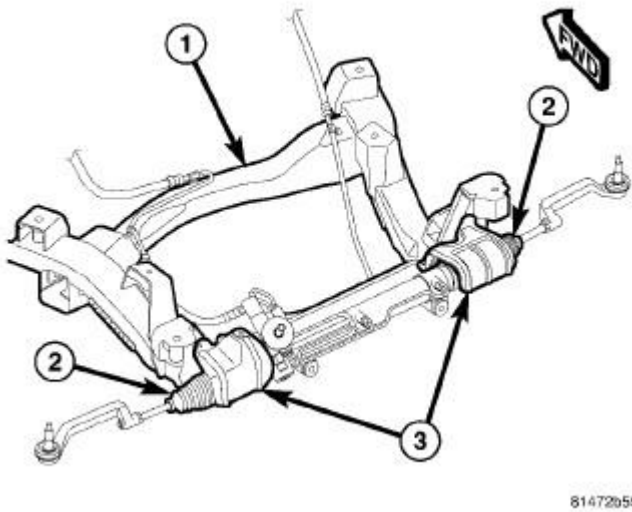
INNER TIE ROD BELLOWS HEAT SHIELD
